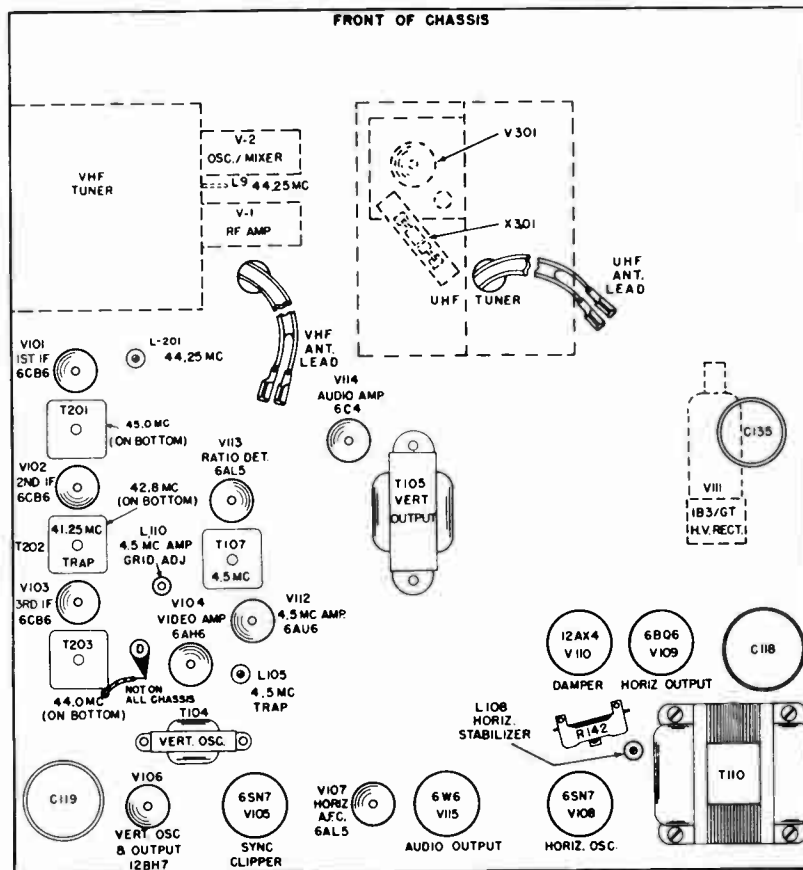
CA. Top View Chassis Alignment Location for Chassis Y & Z1200D
